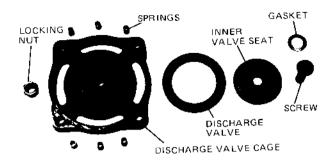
A — ORIGINAL DISCHARGE VALVE CAGE ASSEMBLY
